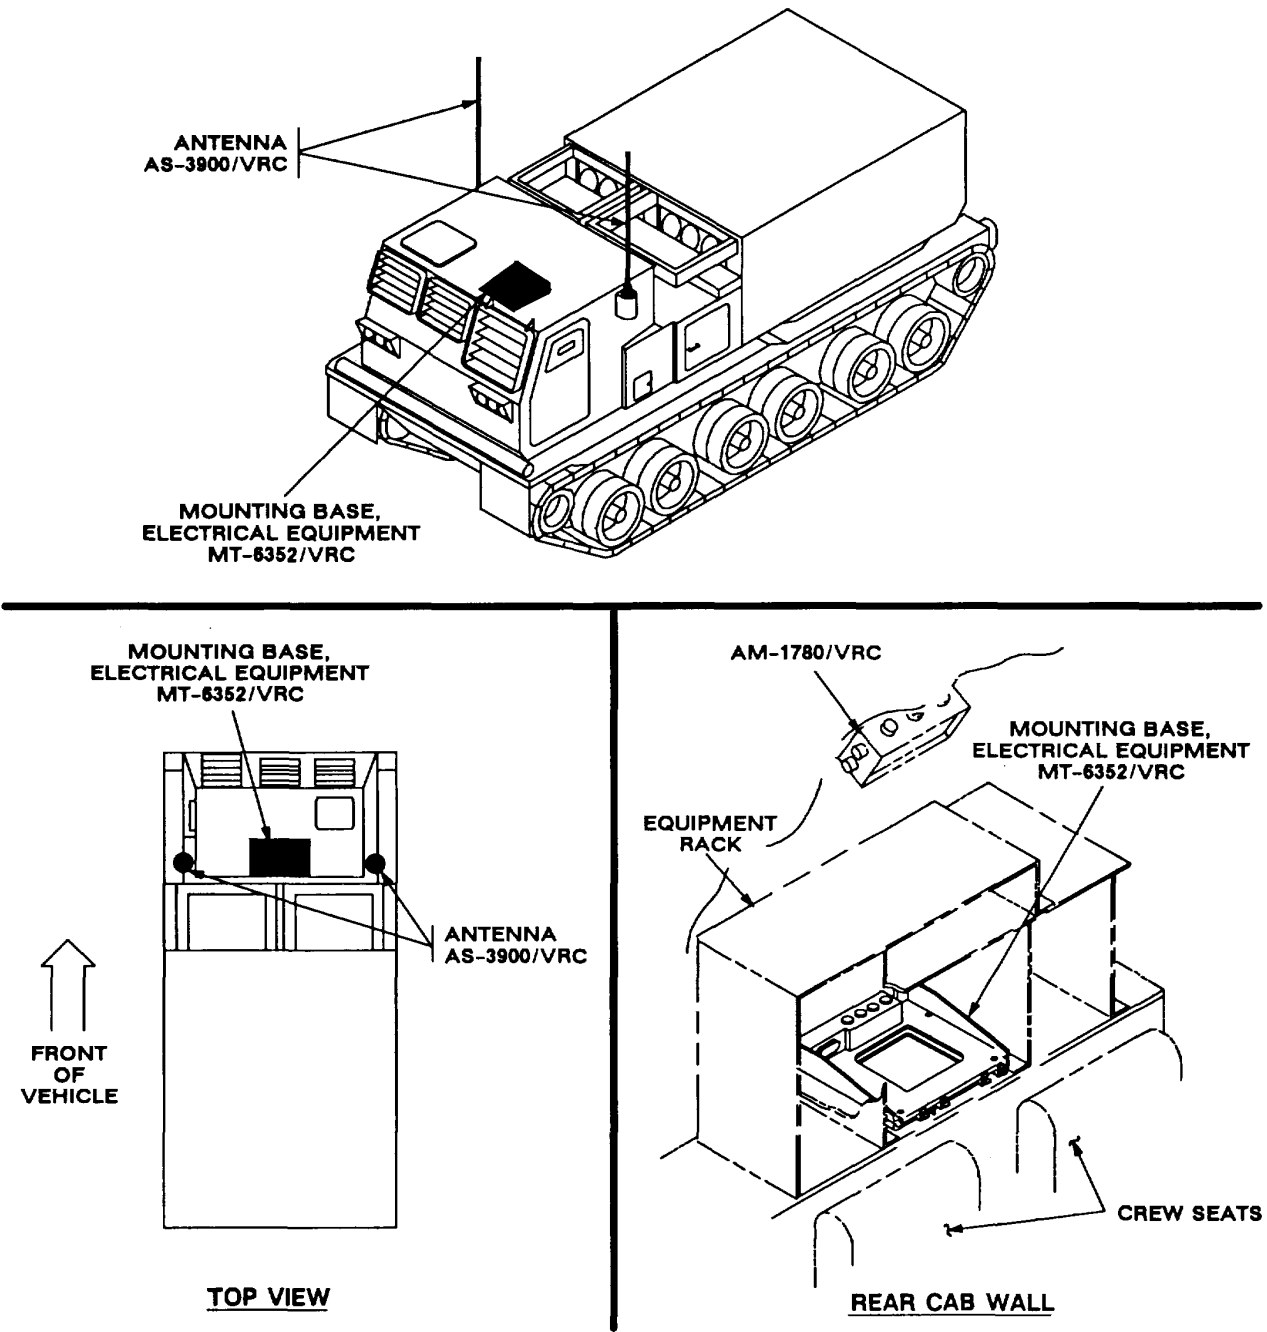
(1). MK and Radio Installation: MK Equipment Locations
